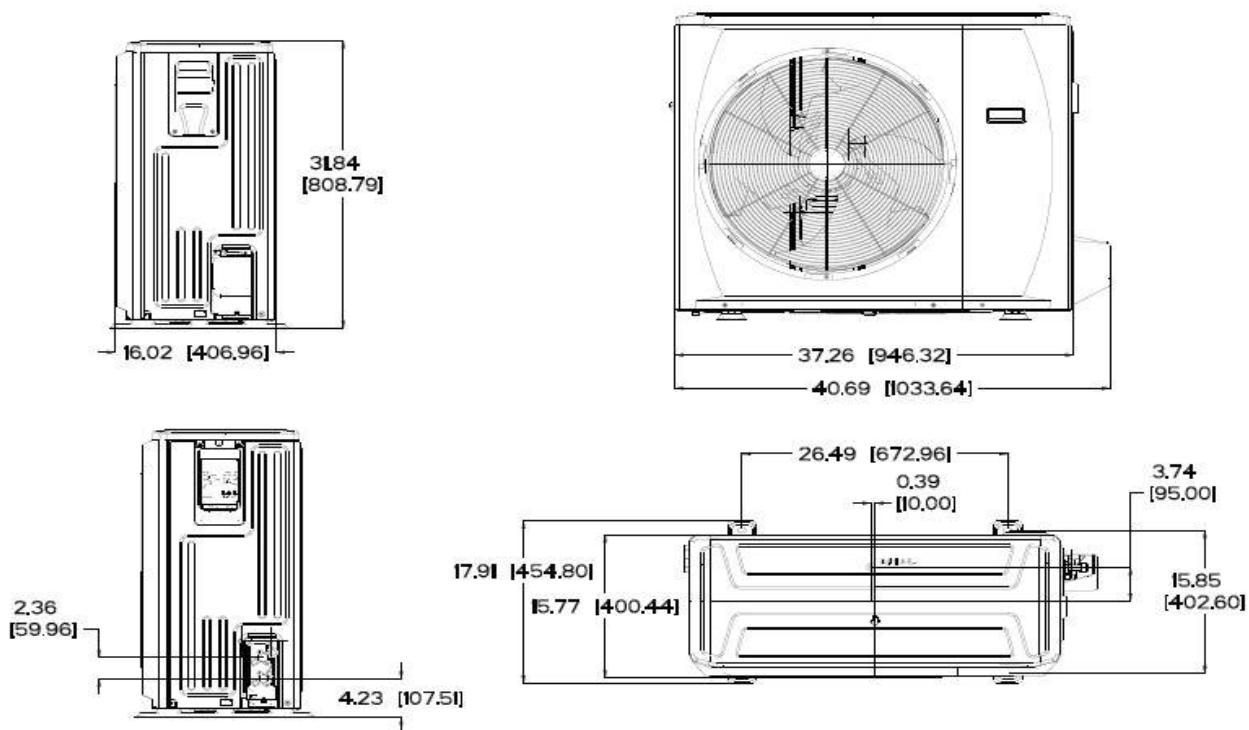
Dimension Sizes 24K, 30K, and 36K
